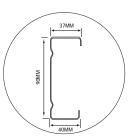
5 HALF BRACE 3MM ALUMINIUM 5005 H34
